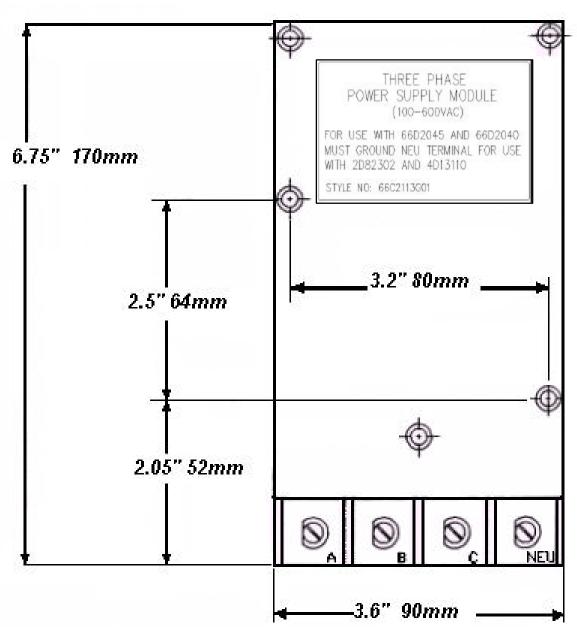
Power Module Physical Dimensions and Mounting Holes
